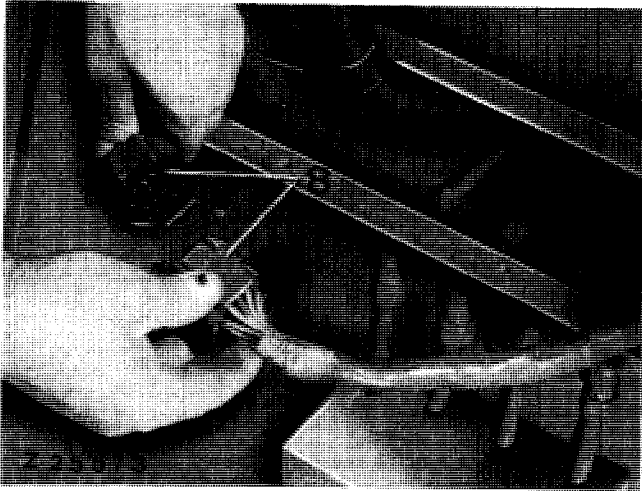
Wiring Harness Plug next to Operator's Seat (Seat Removed)
